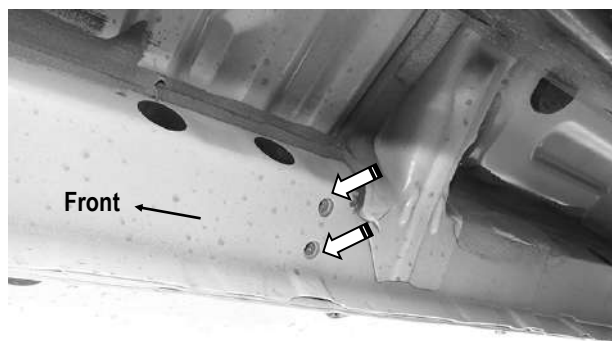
Passenger Front Mounting Bracket (PFM) Installed
